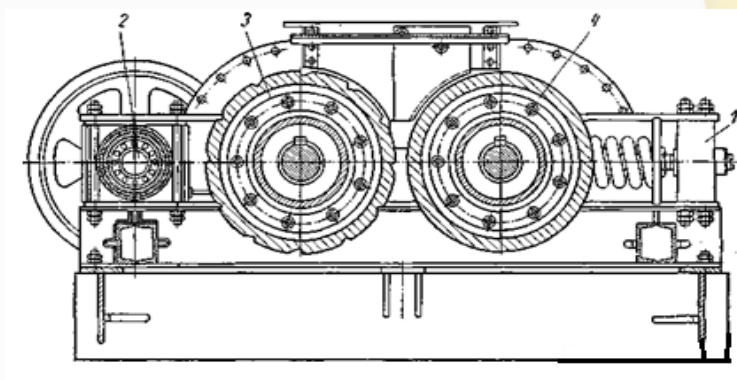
Two-wheel gear grinder: 1 - spring; 2 - gear extension; 3, 4 - gears.
